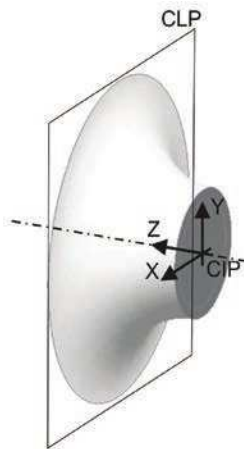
Concave rounded end mill: Revolved body of cutting part
